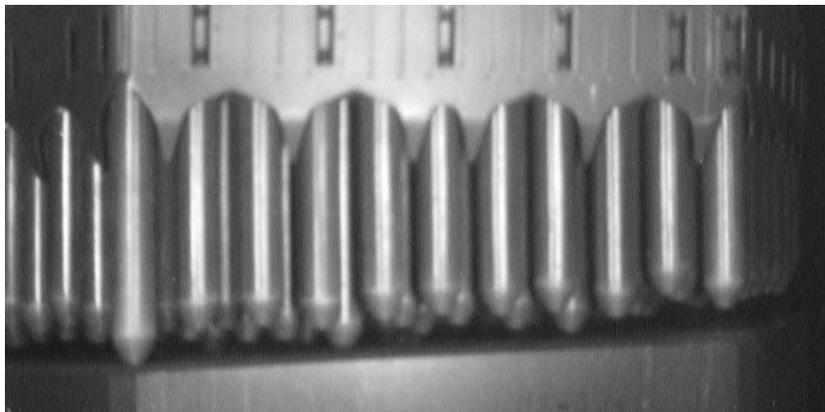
Fuel rod displacement, WLTA AA02-03, face 4, inspection 2010.
